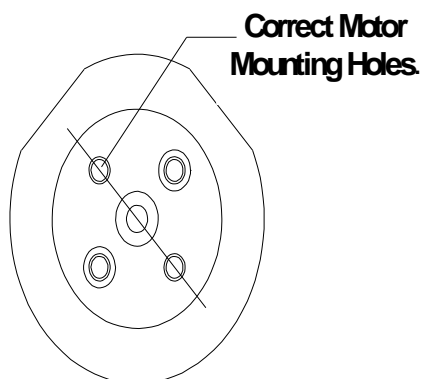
Correct orientation of opto mount with respect to the four holes on the front face of the motor gearbox.
